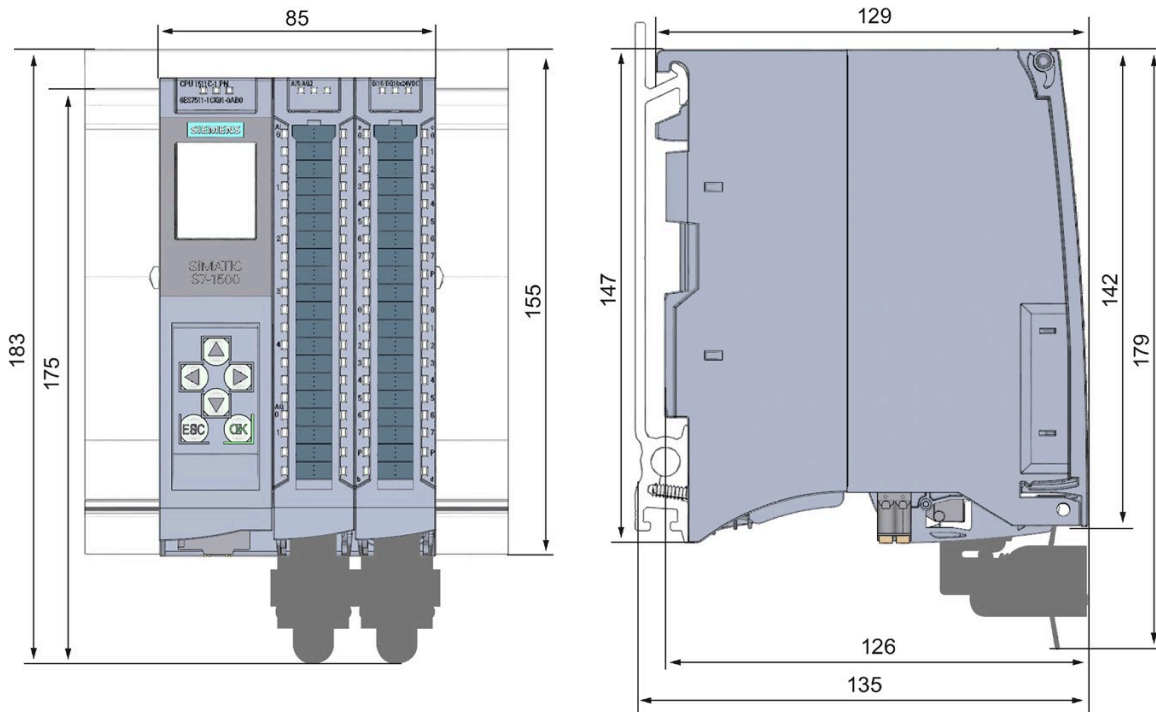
Dimension drawing of CPU 1511C-1 PN – front and side views
